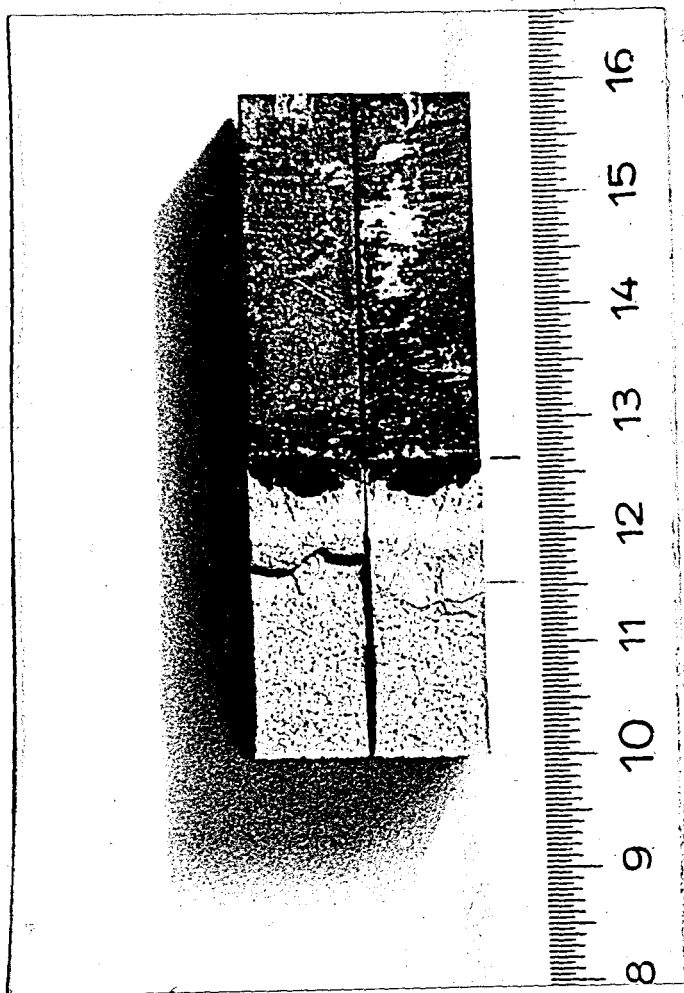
Fracture surfaces of specimen no. 6
